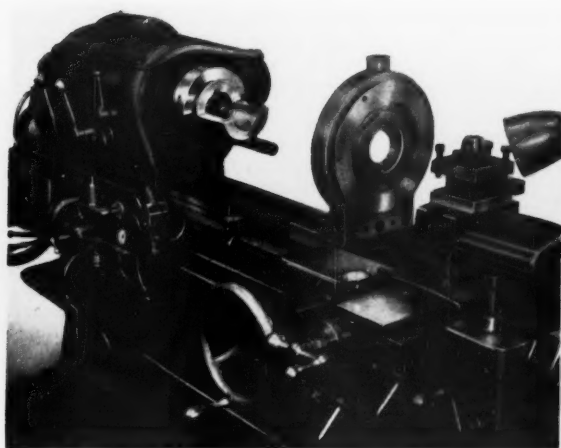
Reed-Prentice lathe for finishing the ball race bore in the flange end of the crankshaft
